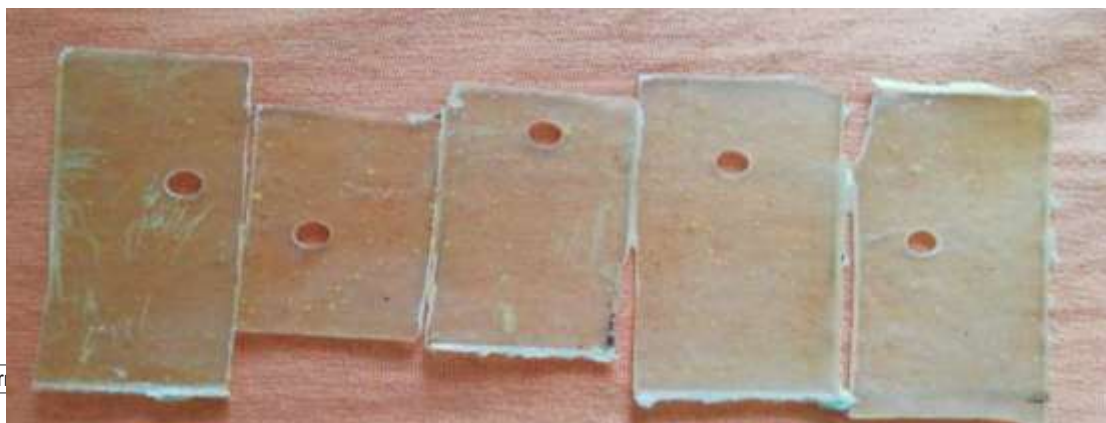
CNC machined Plain epoxy + 10% pista shell powder 16 samples drilled by 8mm drill bit
